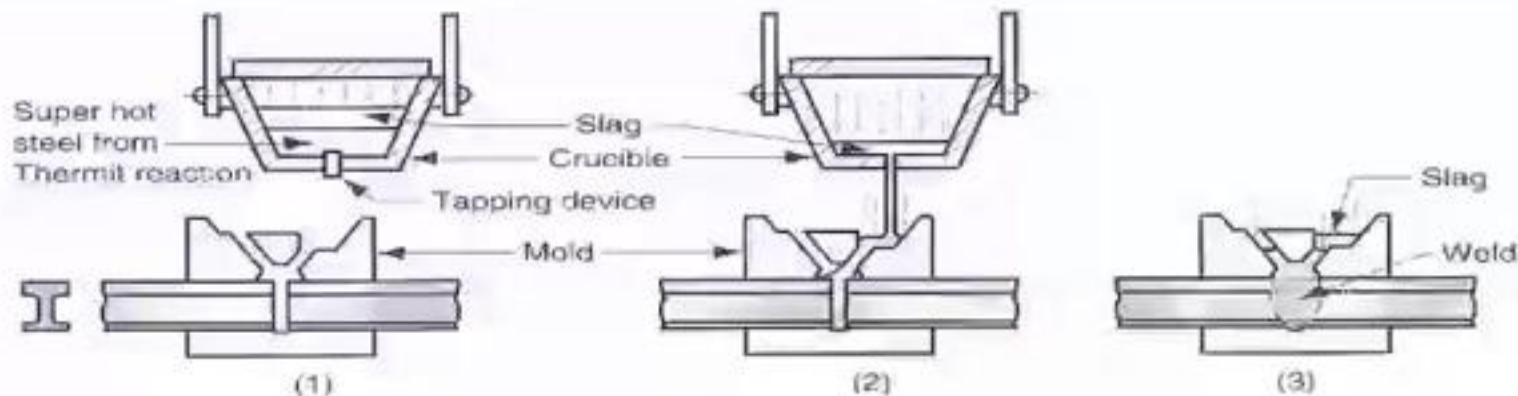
Thermit welding: (1) thermite ignited; (2) crucible tapped, superheated metal flows into mold; and (3) metal solidifies to produce weld joint.
